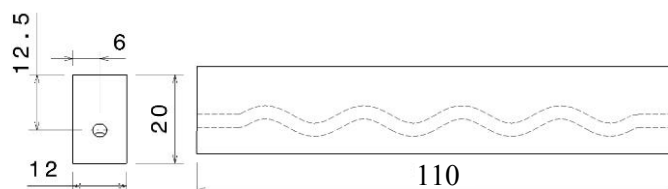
Four-point bending specimen's dimensions (mm): 2D side and front views
